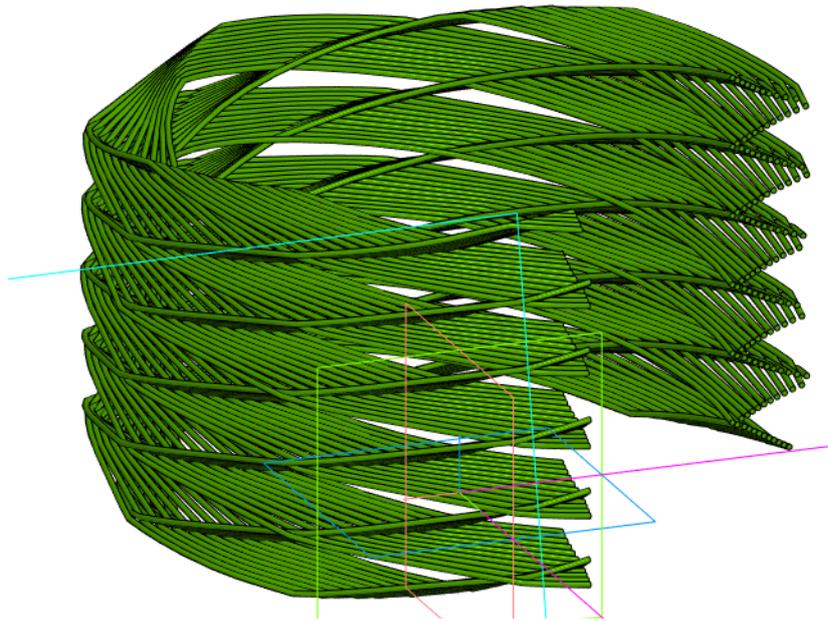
Computer model of thread winding with a honeycomb structure, gear ratio $u = \frac{29}{13}$
